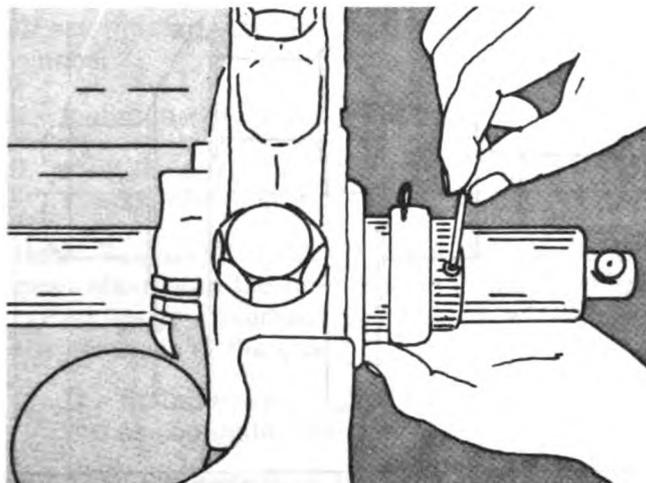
Tighten The Setscrew For The Depth Set Collar
